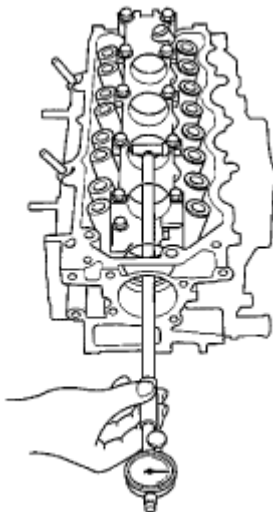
Measuring Inside Diameter Of Each Camshaft Bearing Surface, And Check For An Out-Of-Round Condition
